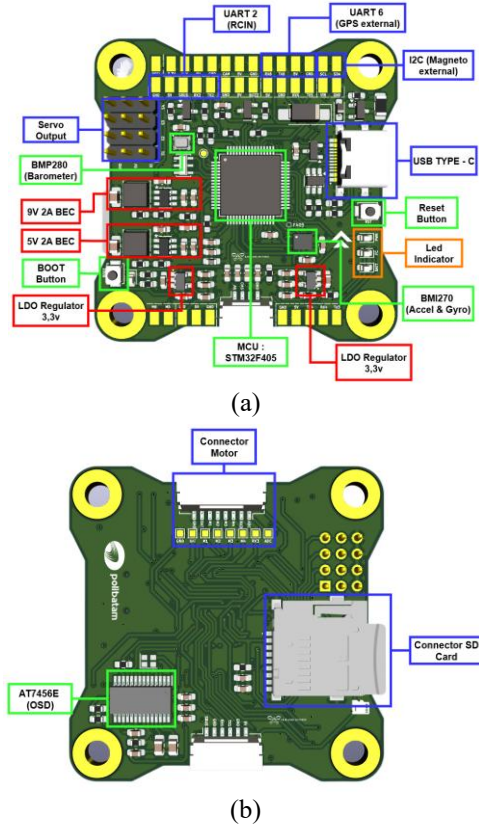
3D Design PCB flight controller: (a) Top side, (b) Bottom side
